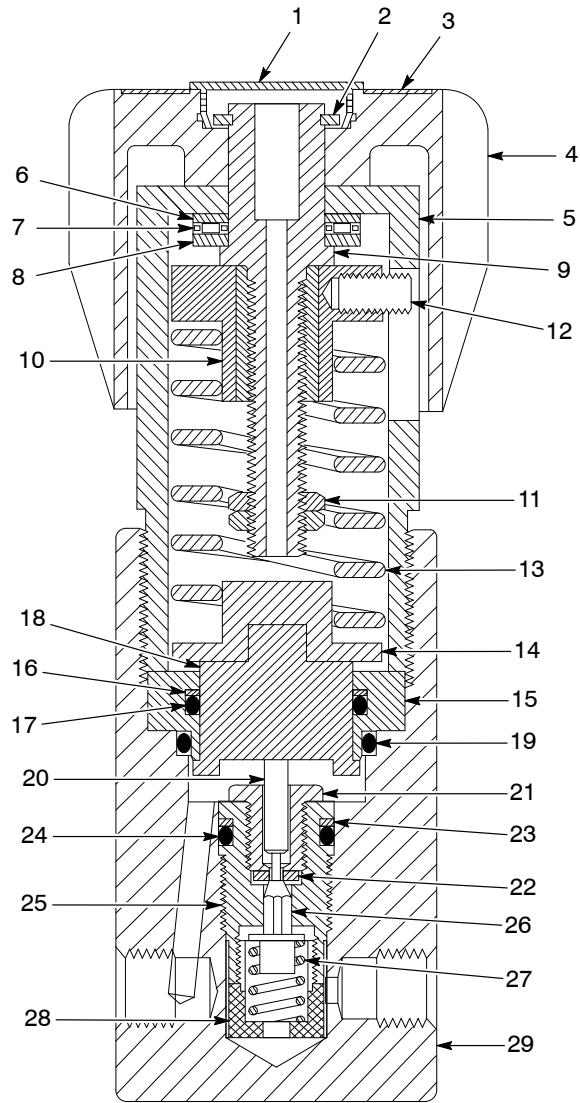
Soft Seat Fluid Pressure Regulator, Cutaway View
